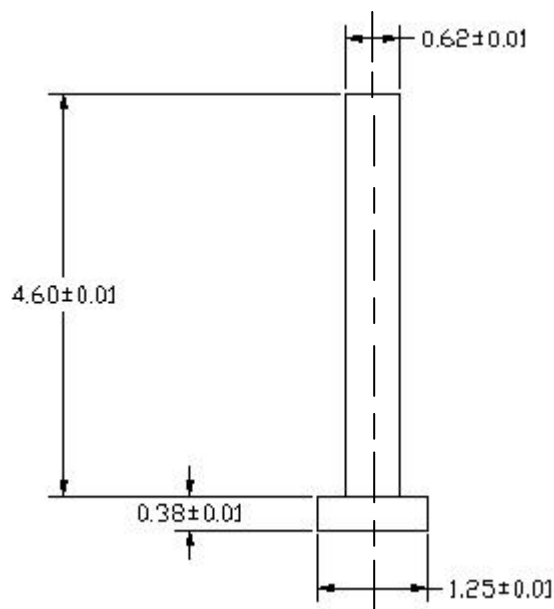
Drawing of the Glass Pedestal for Construction with Dimensions in Inches (Drawing Courtesy of Mr. Richard Harris of the AFRL)
